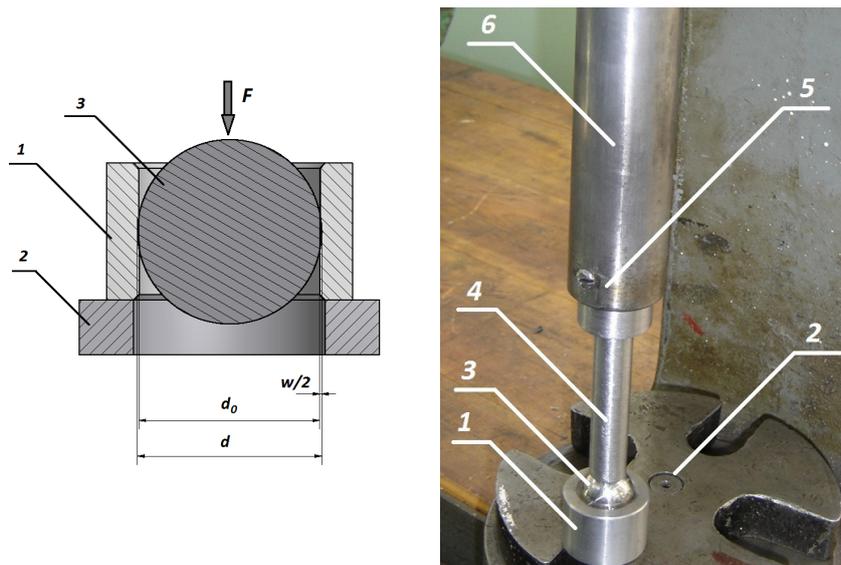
The schema of ballizing process, d – outer diameter of the ball, d_0 – diameter inner tube before burnishing, w – reduction ratio, 1 – tube hole, 2 – basis of hydraulic press PH-16, 3 – ball, 4 – guide-pin ball, 5 – mounting socket, 6 – punch of hydraulic press PH-16
